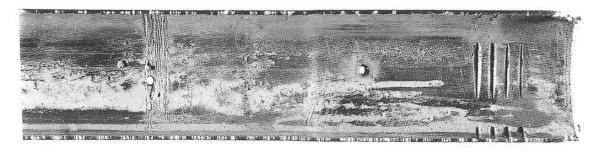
AFNOR Z2 CT 18 (AISI 439L) ferritic stainless-steel tubes exhibiting pitting corrosion and leaks close to the tube inlet, in a zone damaged by the flushing tool used in fabrication [Cattant, 2021].
